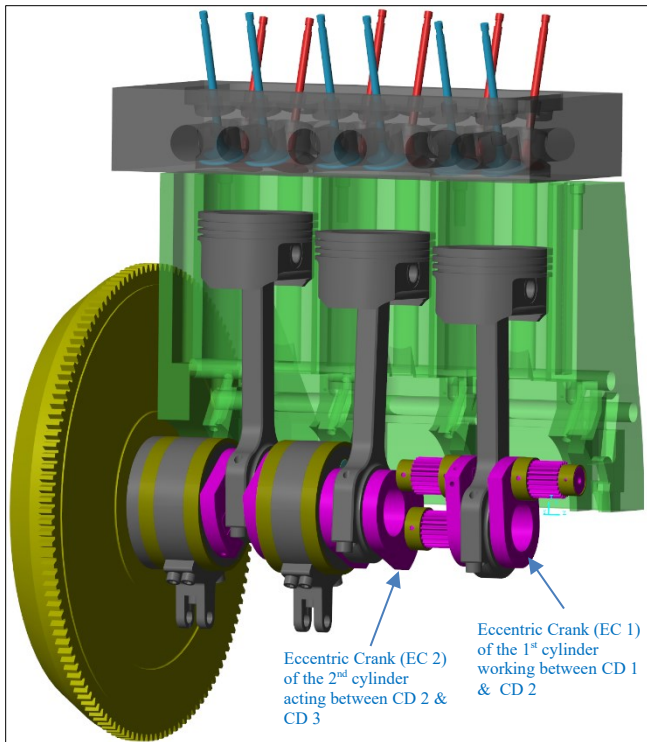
Some inward details of the 3L crank mechanism, such as the Eccentric Crank EC 1 of the 1<sup>st</sup> cylinder and the right side of EC 2.
